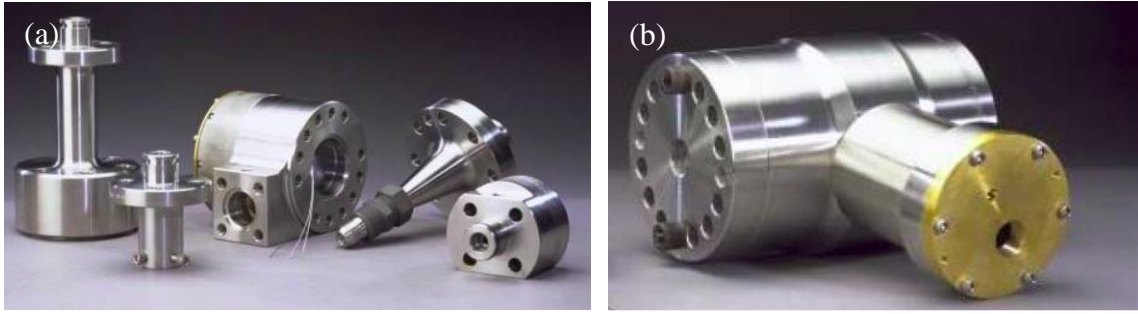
(a) An example of assembled wellhead outlet with specific pressure rating for the fiber optic sensing cable; (b) components of this well head outlet and crossover assembly (Weaver et al., 2005).
